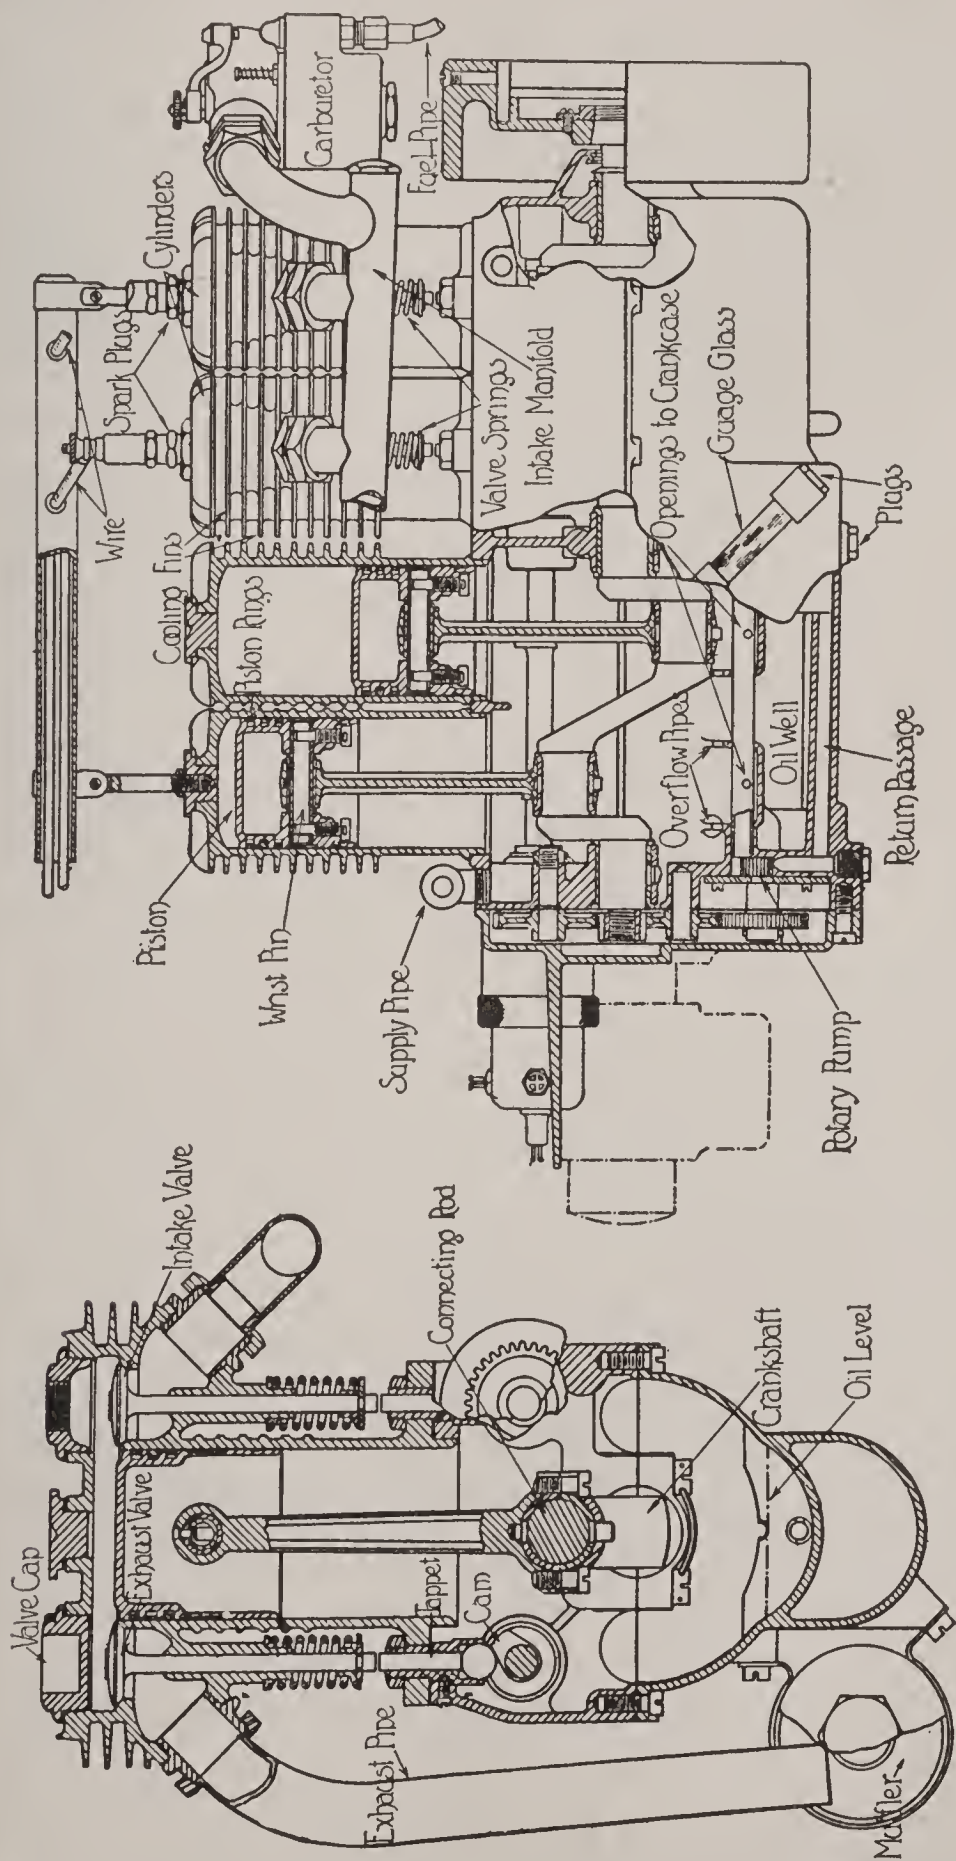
Sectional Views Showing Construction of the Pierce Four Cylinder Motorcycle Power Plant in Which Independent Cam Shafts are Employed to Operate the Valves.
